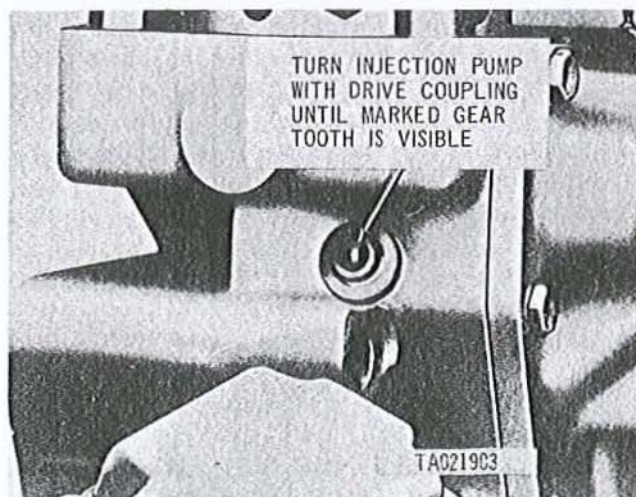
Fuel injection pump timing hole showing marked gear tooth.
